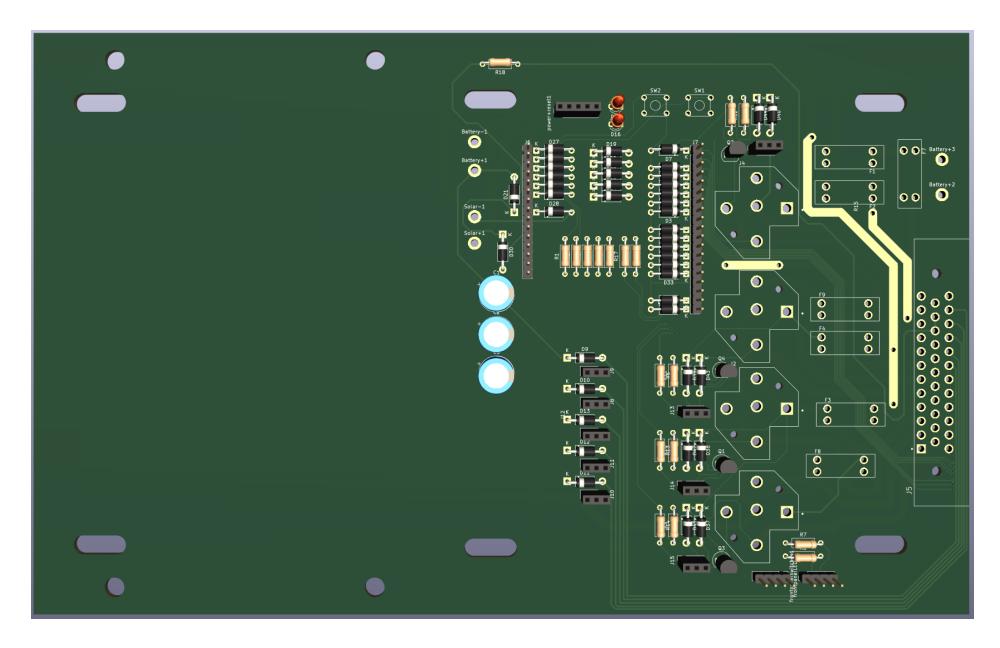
Front View 3D Model of the PCB Displaying All Components In Their Place
